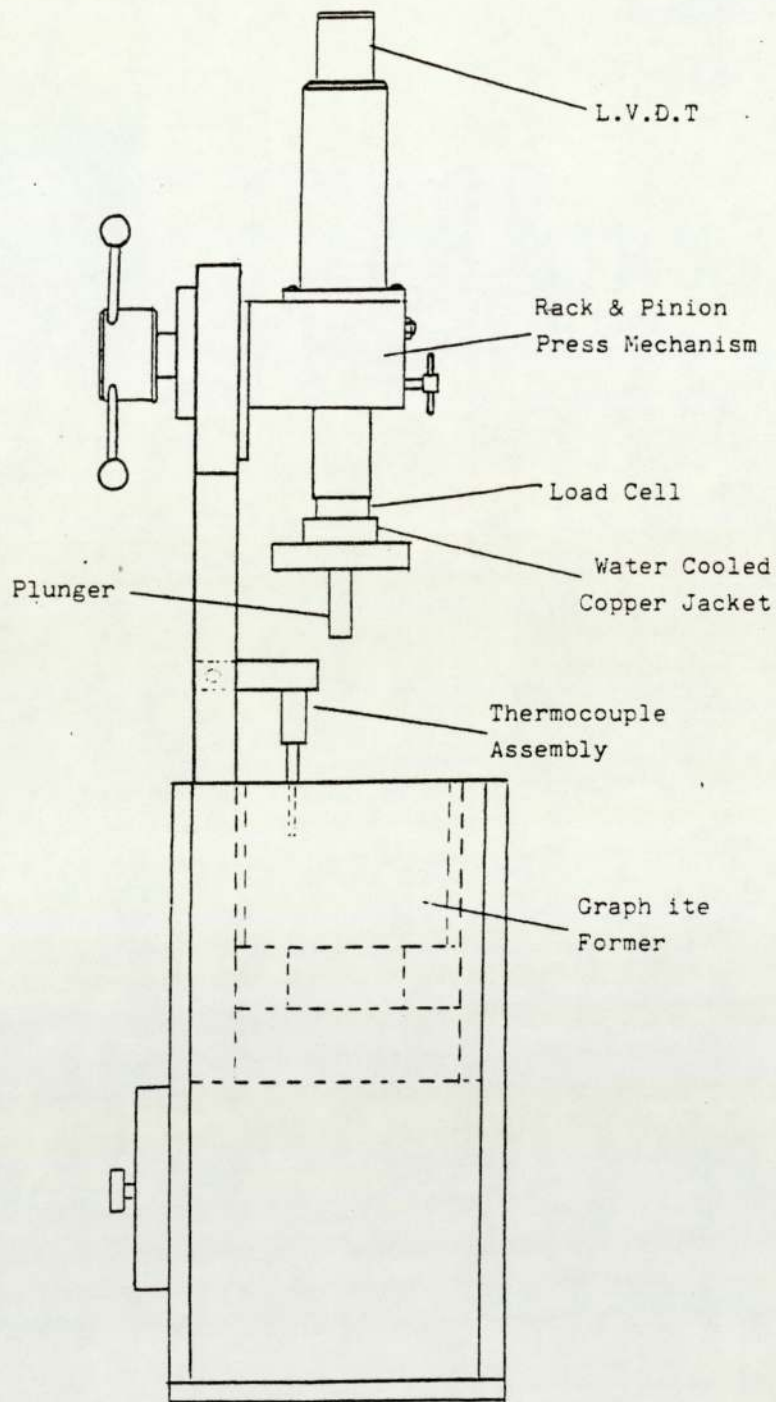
HELICAL FORMING UNIT - FRONT VIEW
